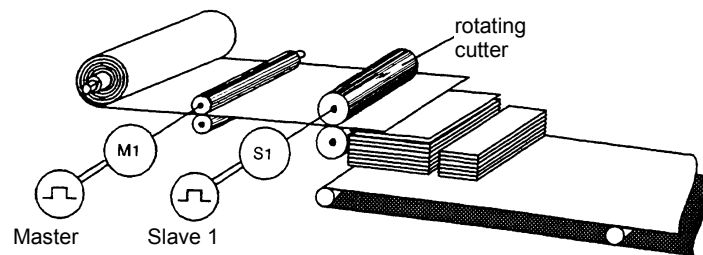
Cutting a Moving Sheet with a Rotating Cutter
